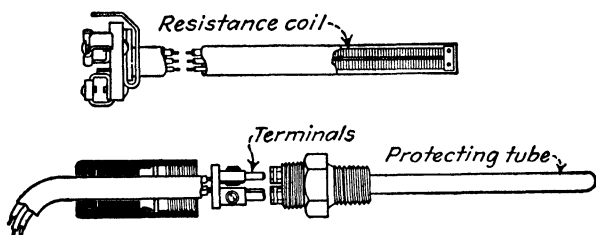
Resistance search coils with protecting tube and terminal plug. (Courtesy of The Bristol Co.)
